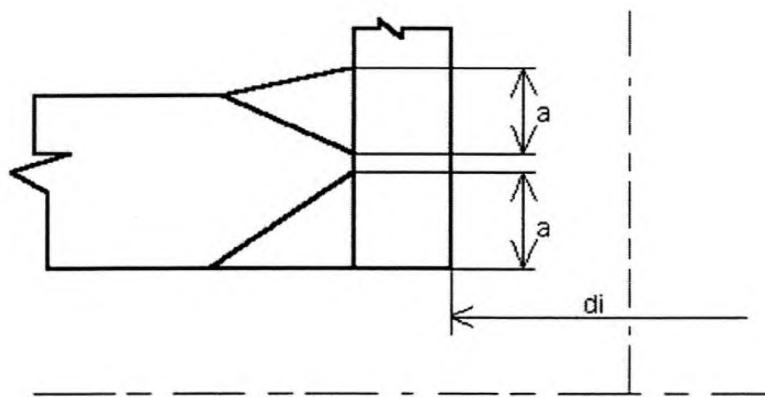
Definition of “a” for types of weld 17, 18 and 19
